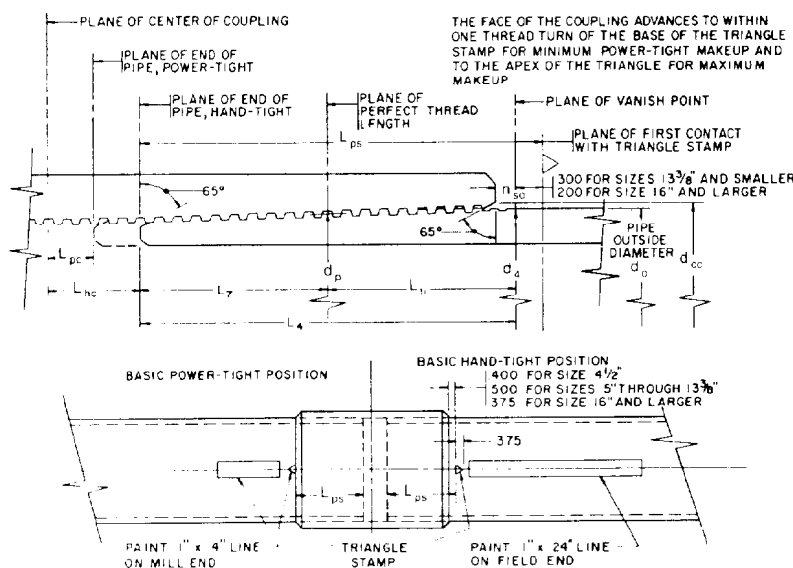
B—Basic dimensions of buttress casing threads, hand-tight makeup.
